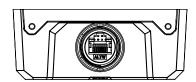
Outline drawing with dimensions, Generic Converter Unit
